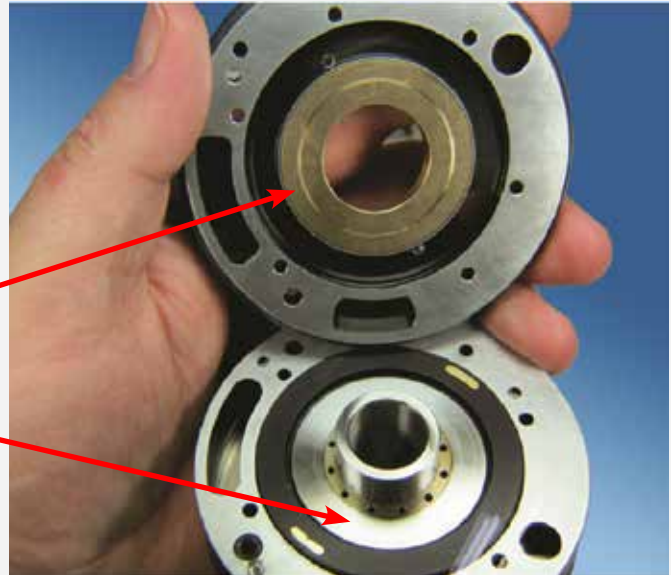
Rear Thrust Bearing and Shaft Thrust Area
